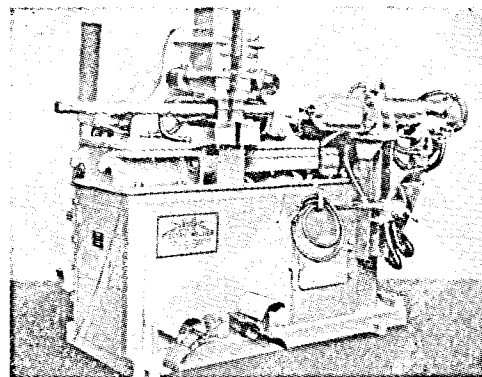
A-I Automatic Flash-Butt Welder With Tube Stripper.
